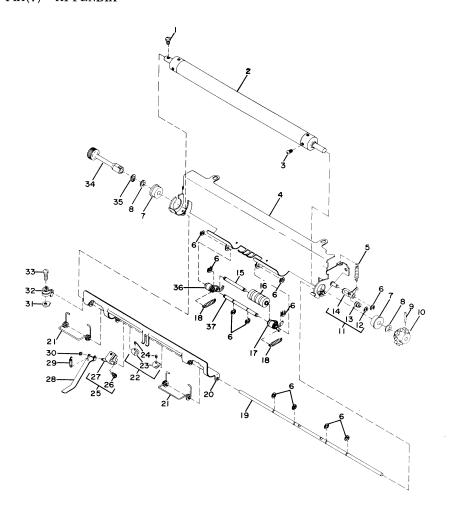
Print Hammer, Print Cylinder, and Print Cylinder Yoke Assembly SL-4-03315B Figure 10
